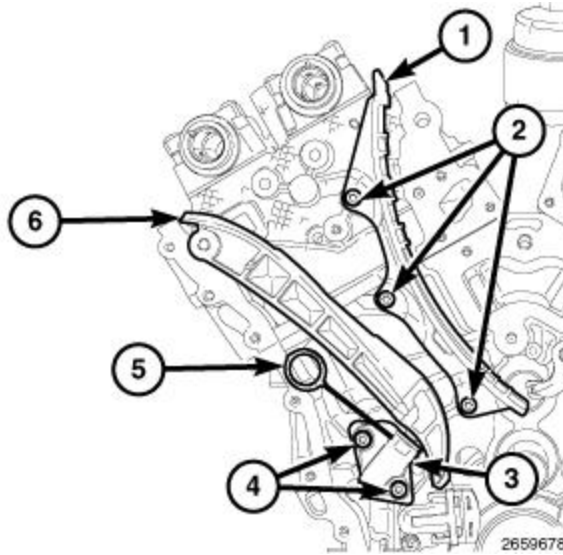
Right Cam Chain Tensioner, Arm, Guide & Bolts
